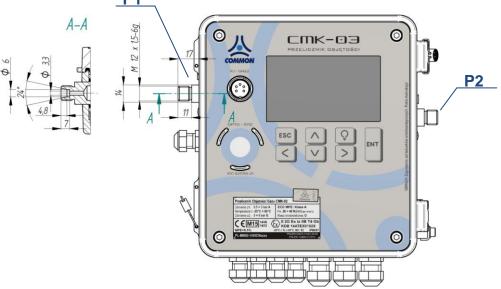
The construction of the M12x1,5 pressure connection pipe
